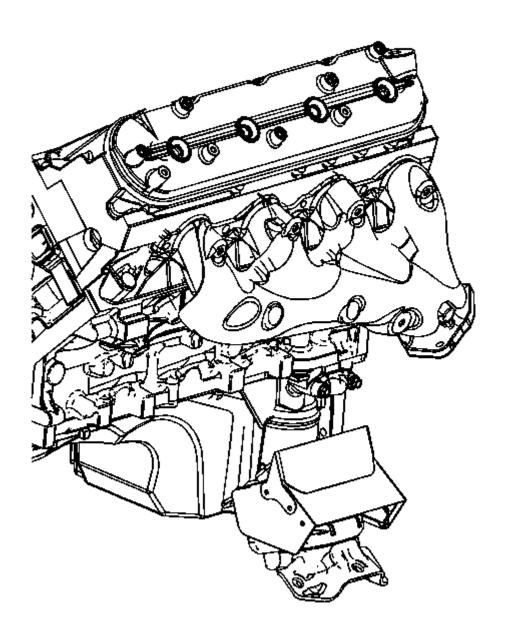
View Of Engine Mount Courtesy of GENERAL MOTORS CORP.
